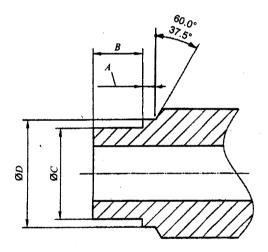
Socket Welding End Preparation for Class 800 and Class 1500
